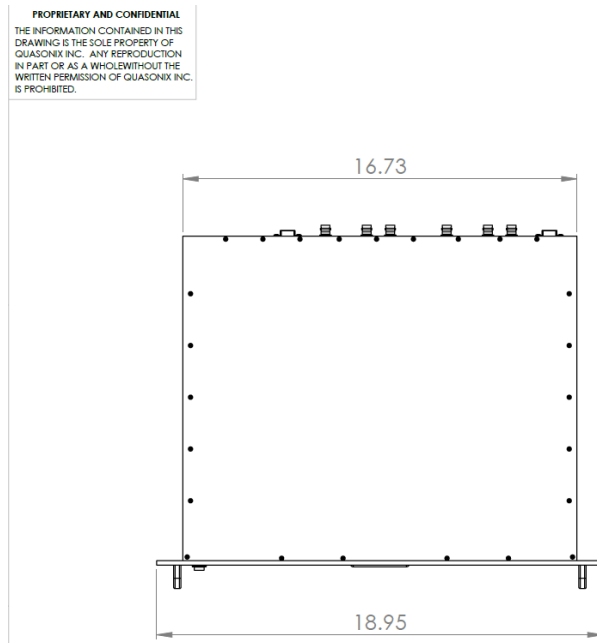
Mechanical Drawing – 1U Top View - EVTM 1U Rack Mount Encoder/Decoder
